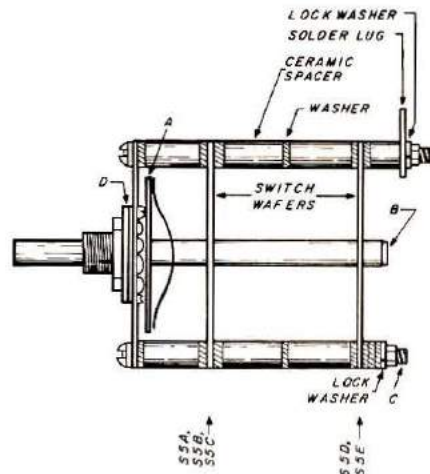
Sometimes you can buy switches in kits, and assemble your own. This will help you identify the parts of a typical wafer switch. The washers are usually of a fiber or phenolic material, and are used to cushion the ceramic spacers against mechanical strain.
